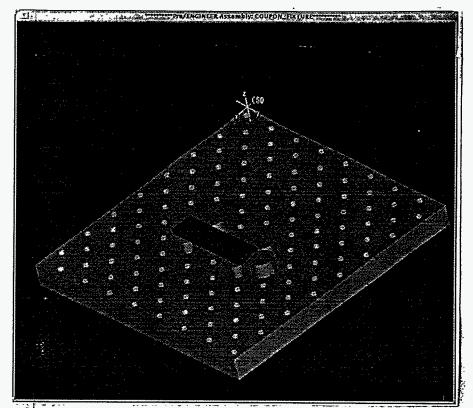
Machining Coordinate System Placement in Pro/MANUFACTURING
